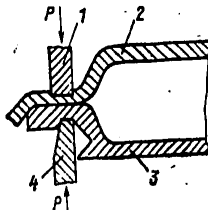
Diagram of two-way cold welding of a IC case. 1 -- upper flat punch; 2 -- cover made of soft material (copper); 3 -- base of the case made of harder material (kovar); 4 -- lower trapezoidal punch; P -- compressive force.
